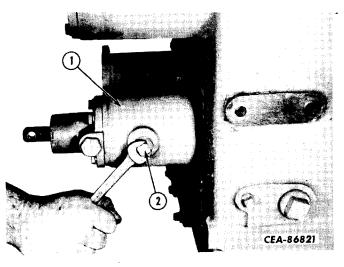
PRINTED IN UNITED STATES OF AMERICA
